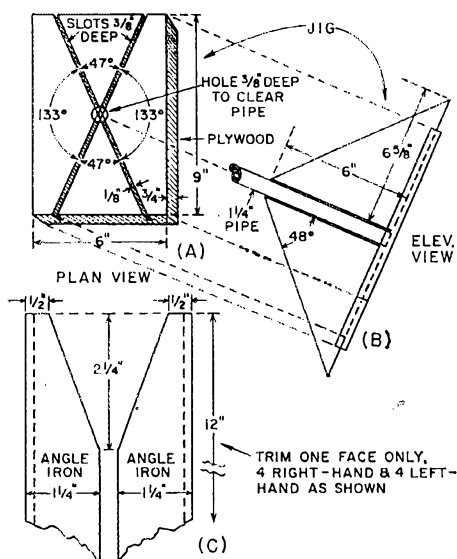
A—Dimensions of the jig base. B—Jig Assembly. C—Angle-iron spreader supports.
